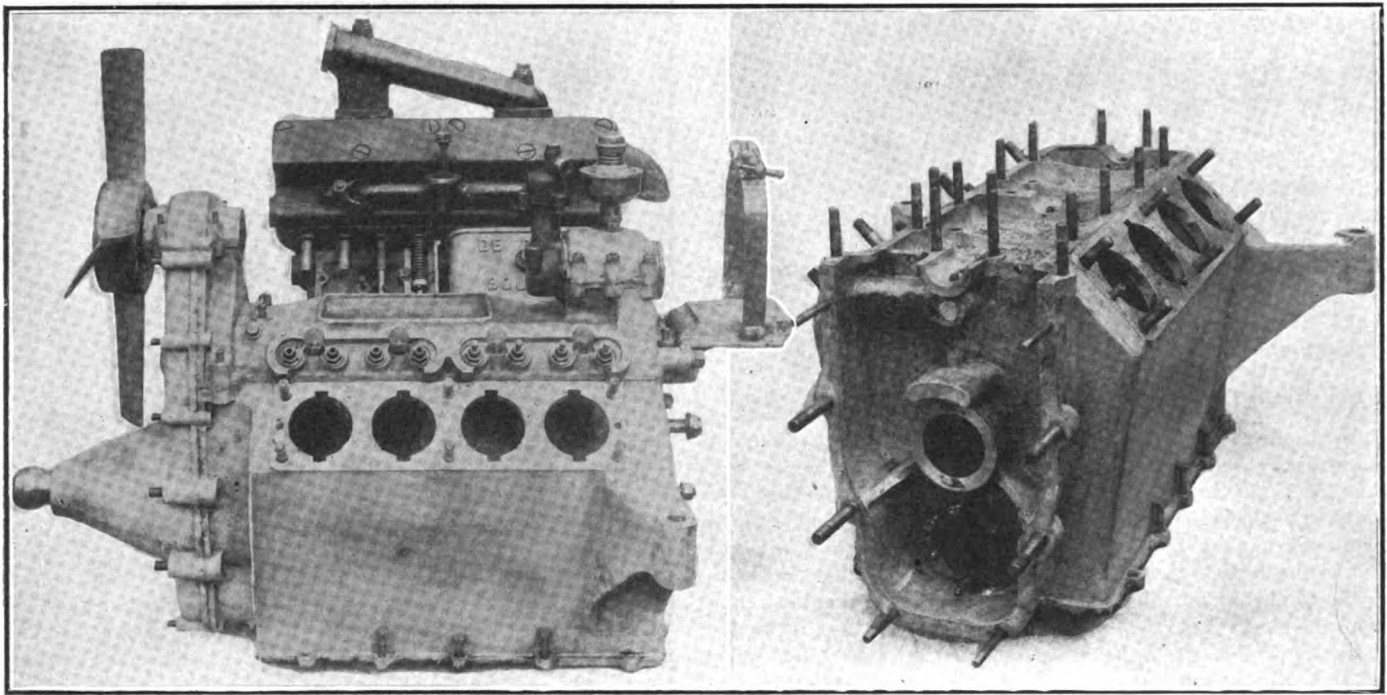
Left—Another view of the motor with the left cylinder block removed
